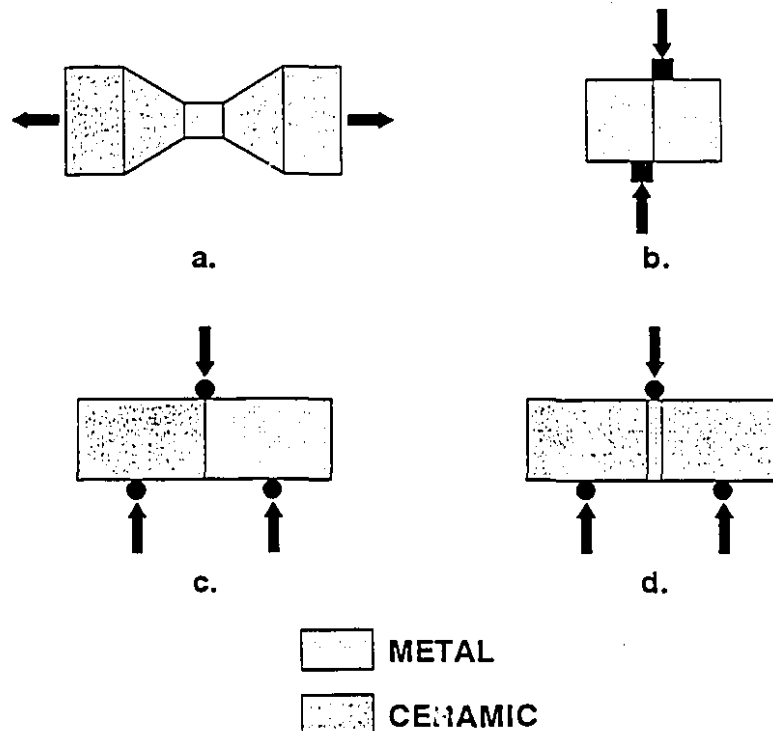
Schematics of mechanical tests performed on ceramic-metal joints. (a) Tensile; (b) shear; (c) flexural on single joint; (d) flexural on double joint [1,17].
